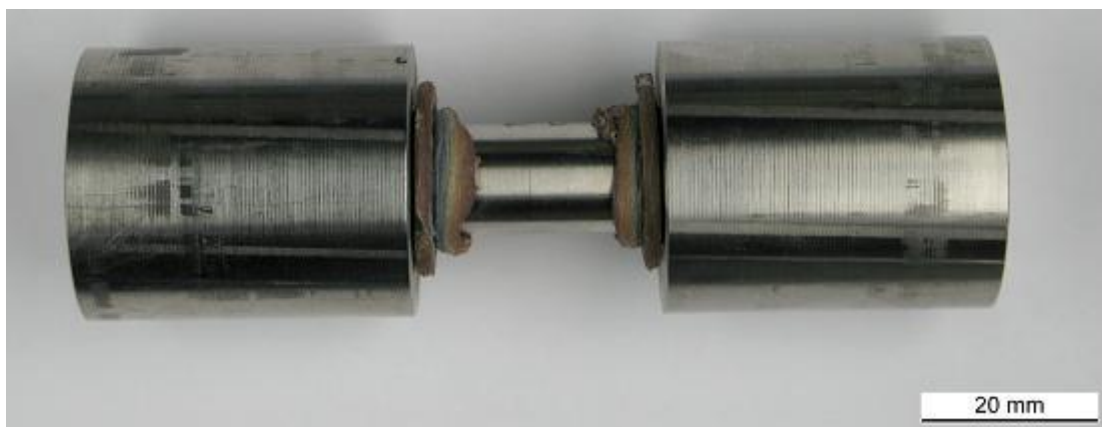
Friction welded dumbbell specimen A8
